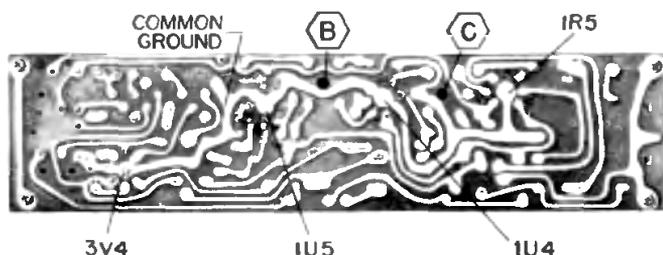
Bottom View of Chassis 200. Tube Locations and Alignment Points Shown.
